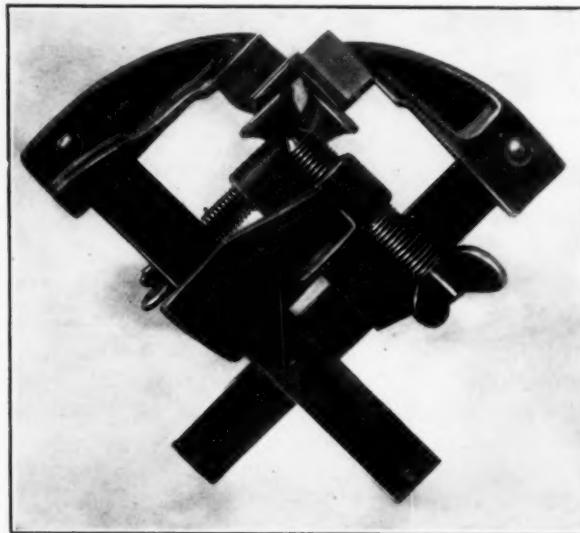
CLAMPING ARRANGEMENT FOR WELDING TWO THIN PIECES
